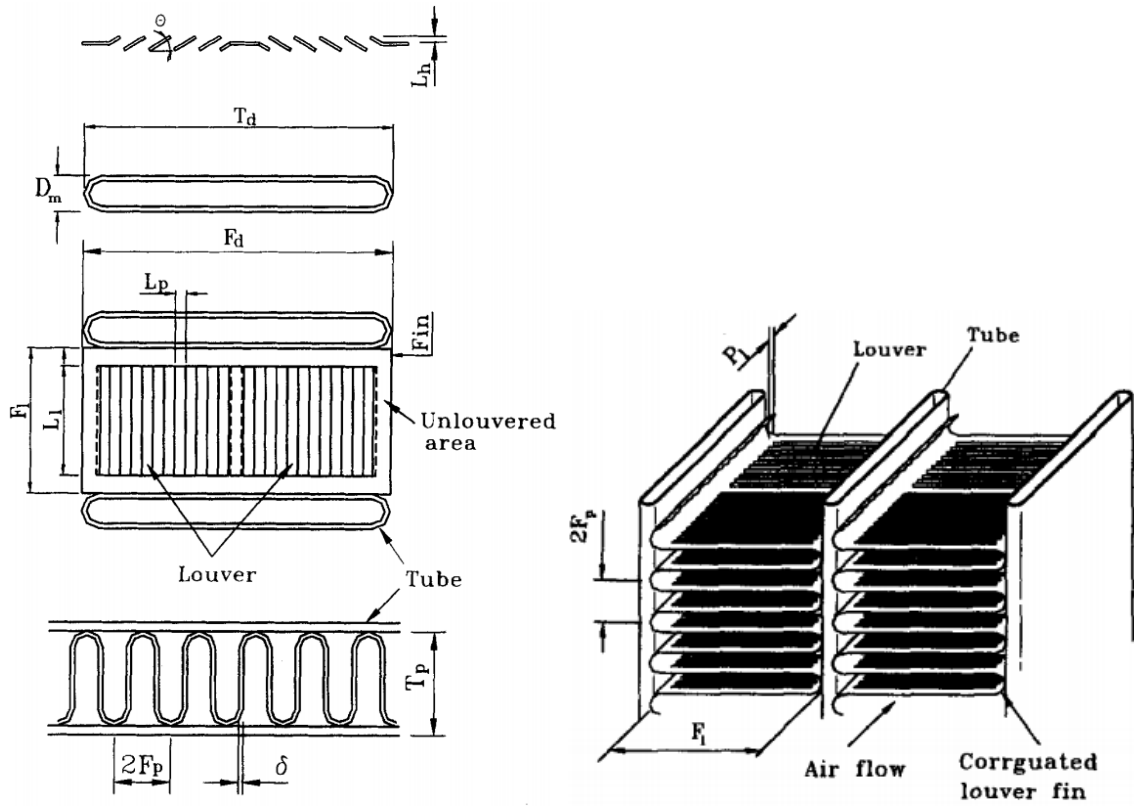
Corrugated serpentine louver fin and flat tube configuration and dimensions [16]
